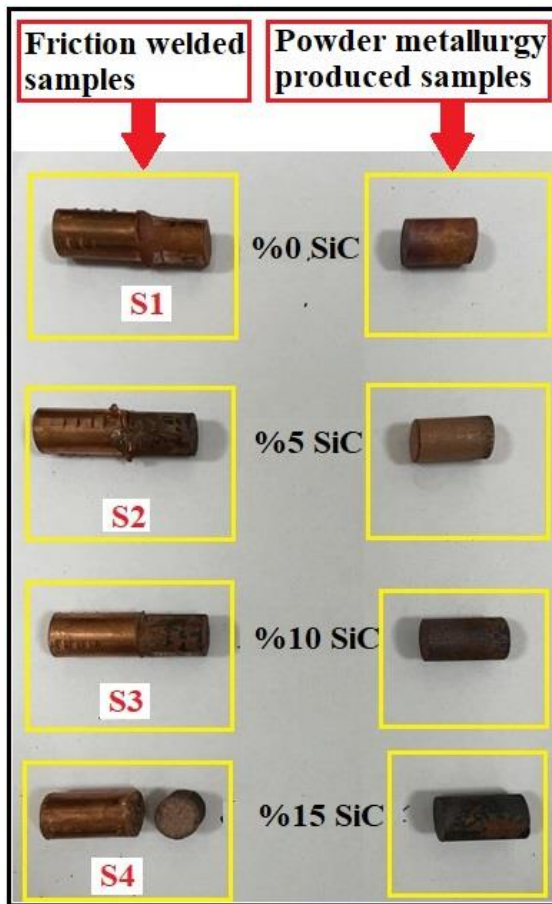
Images of the composites produced and friction welded specimens of these composites [26]
